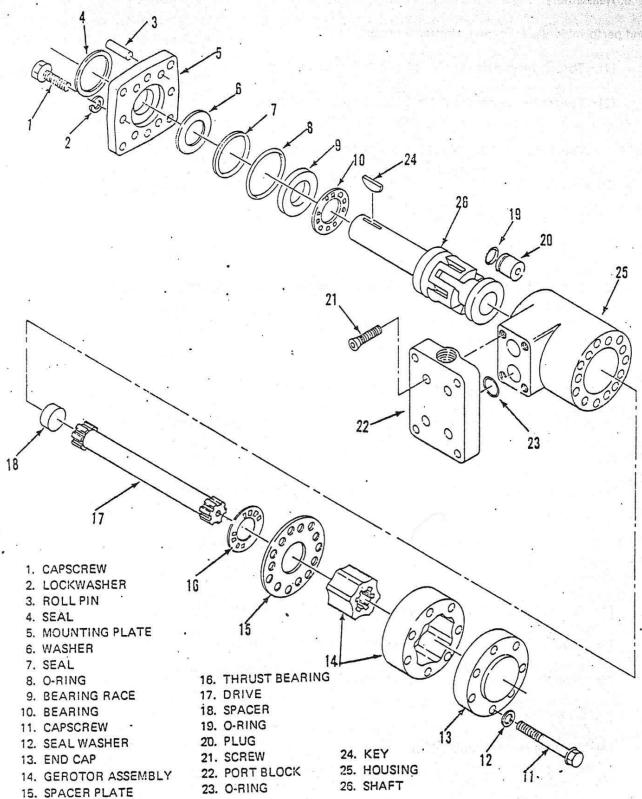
Water Injection Drive Motor (CHARLYNN)
